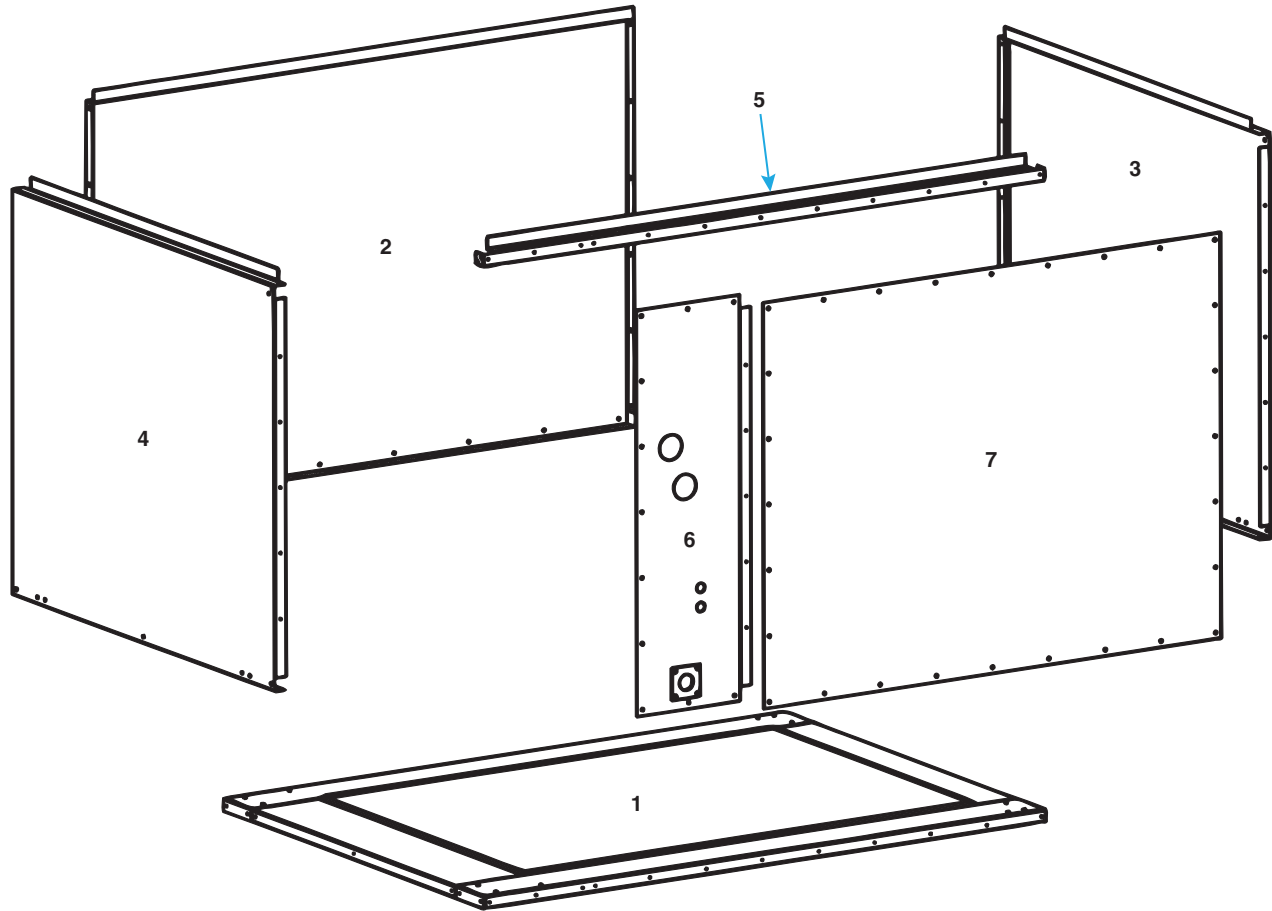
ACU Cabinet Assembly (Refer to [Table 28](#))
